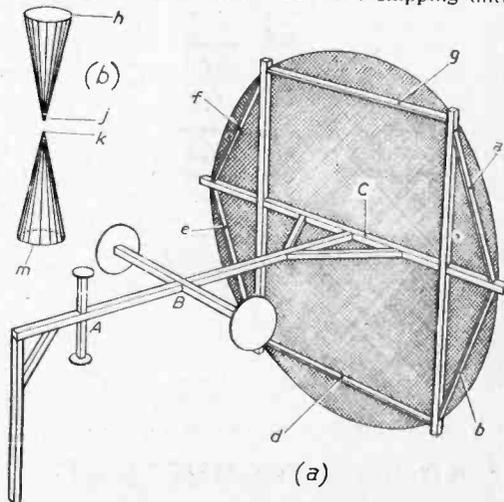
For horizontal polarisation dipole may require additional support. (a) All woodwork 1 in. square excepting a, b, d, e, f and g, these being 1 in. x $\frac{1}{2}$ in. All joints half-lapped and screwed excepting at A and B where $\frac{1}{2}$ in. holes are drilled and $\frac{1}{2}$ in. dowel rod fitted. Bases of cones are plywood discs. (b) Copper strip or bonding wire around h, j, k and m to support wires. Connect coaxial cable to i and k.
